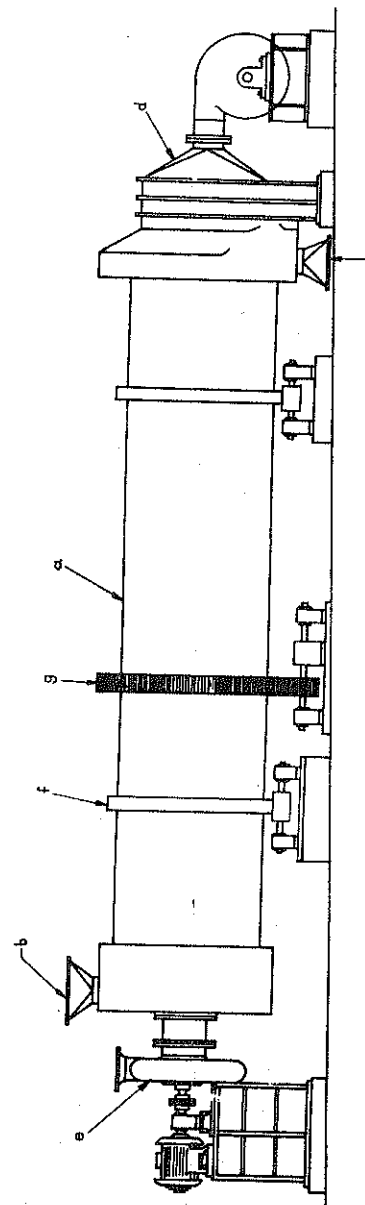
Rotary dryer (a) shell (b) feed hopper (c) discharge hopper (d) air preheater (e) exhaust (f) tyre (g) gear wheel
